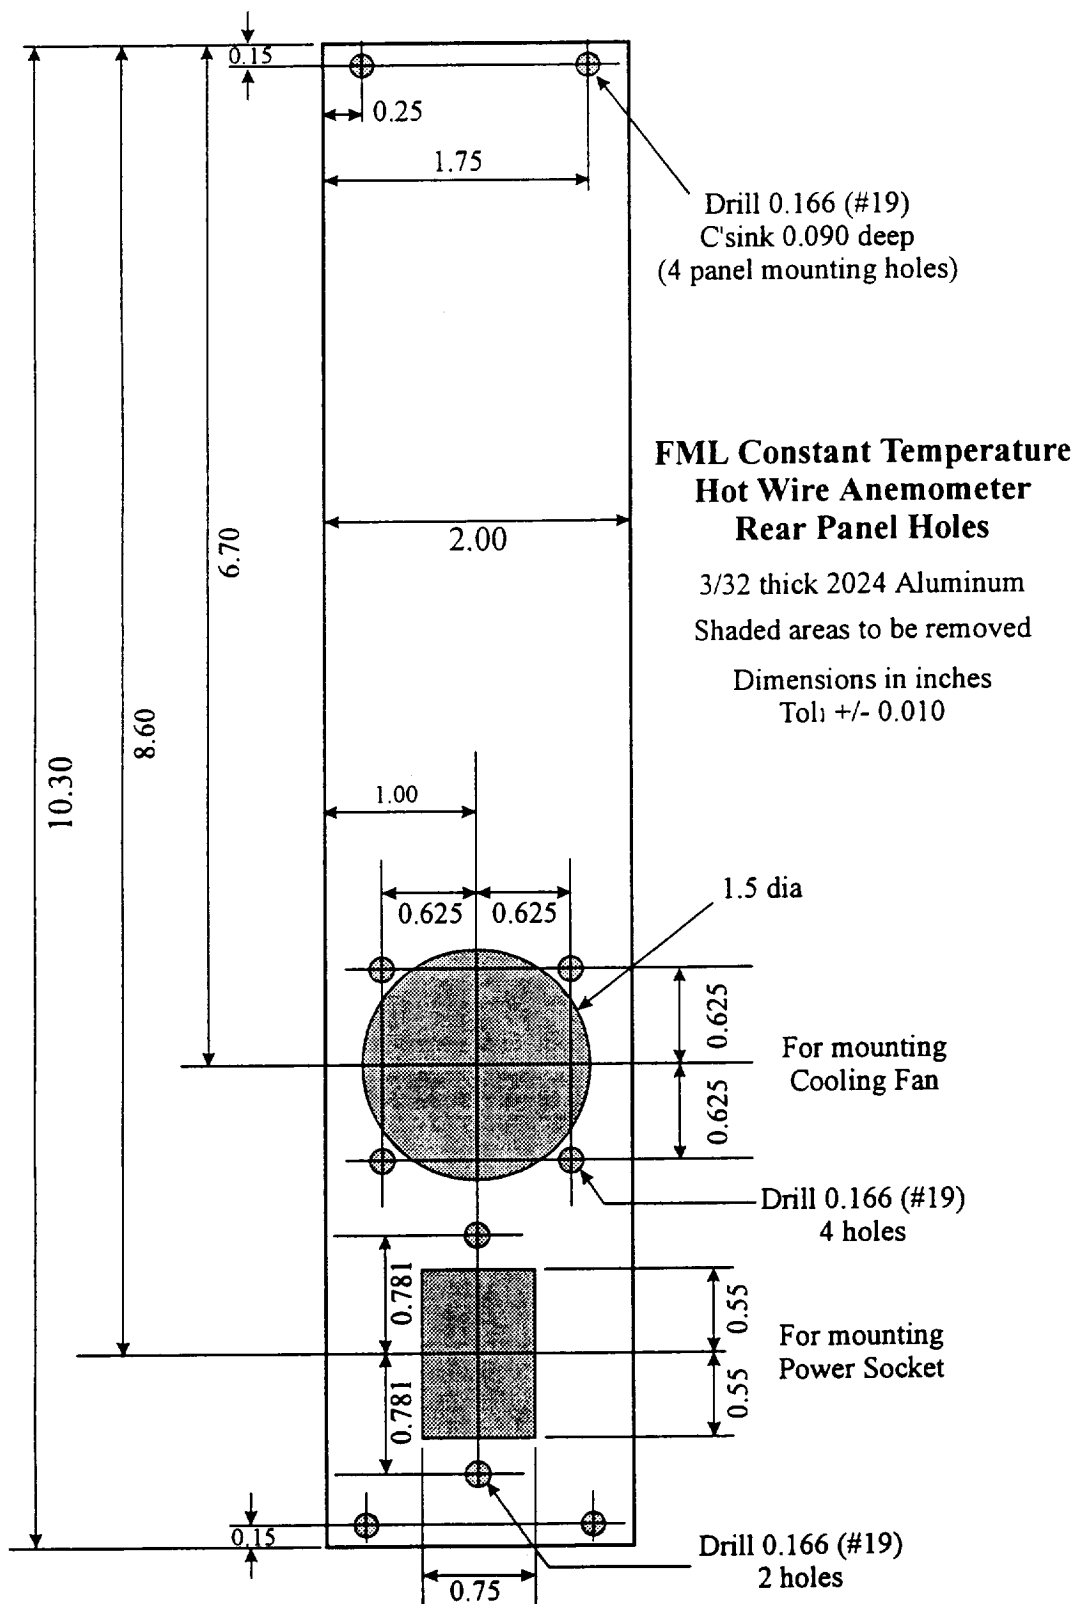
External dimensions of rear panel and specification for holes.
